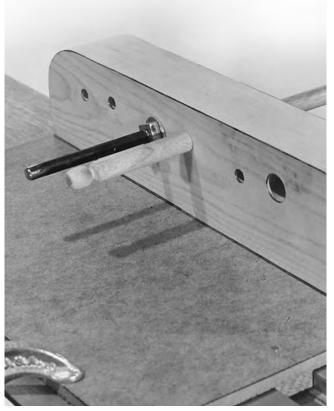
The bolt, which is part of the dowel turning fixture, serves as a tool rest. Apply paste wax to the dowel so it can turn with minimum friction.
